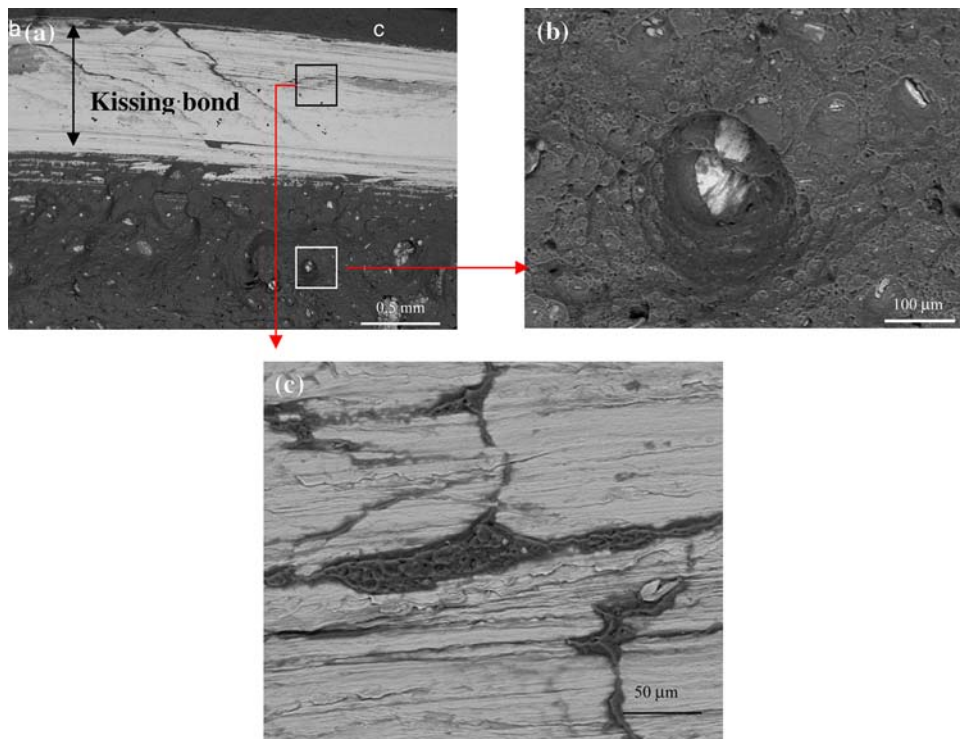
Electron microscope pictures for the breaking surface in the tensile specimens of the steel and aluminum alloy joints; a macroscopic view, b and c partially enlarged pictures
